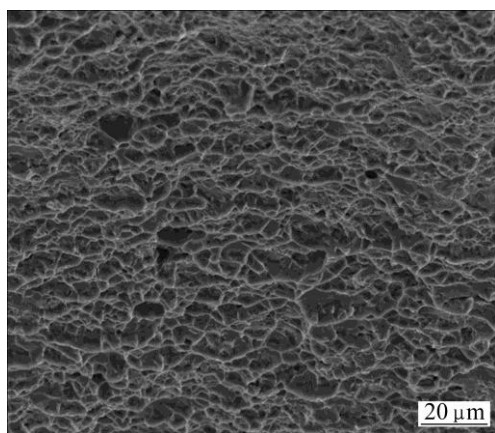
Fracture morphology in typical tensile positions of fractured sample
